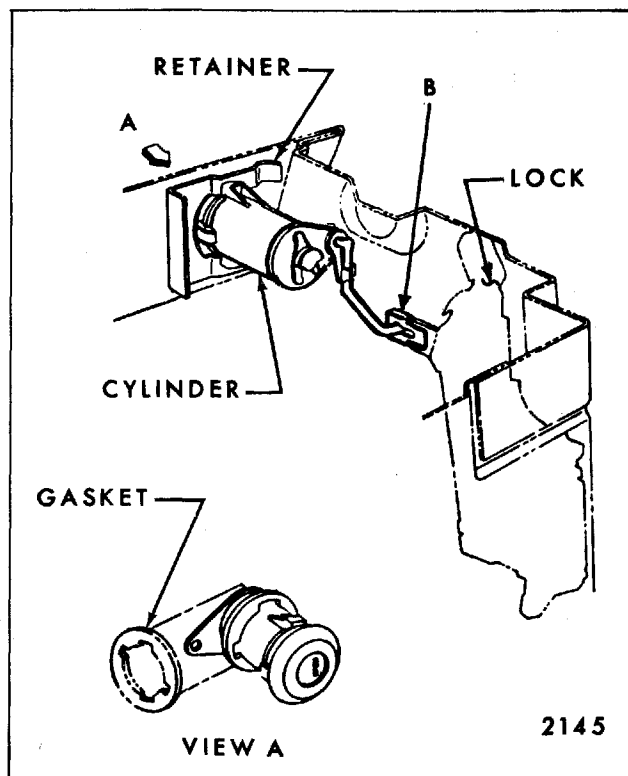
Front Door Lock Cylinder Removal - Chevrolet "B" Four-Door Styles
